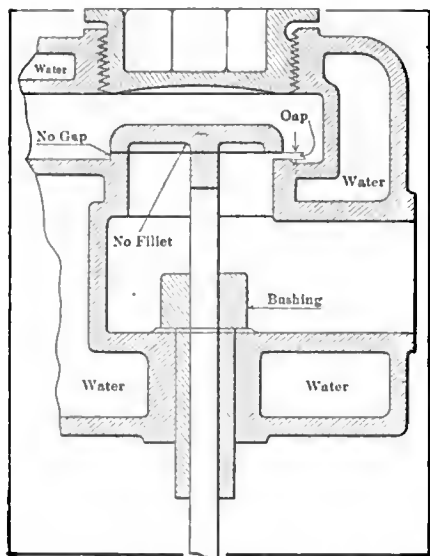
Flat seat type of valve without a fillet, which warps when heated
